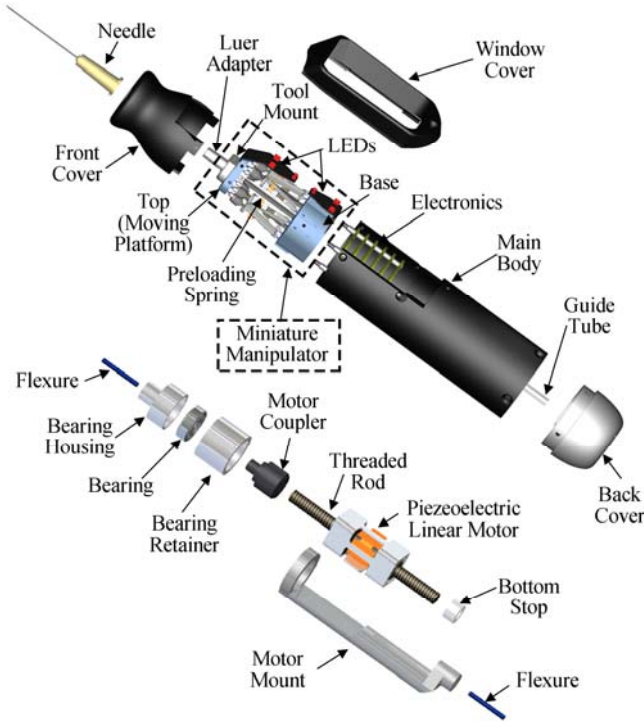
Exploded view of the handheld manipulator assembly (top) and the linear actuation module (bottom).
